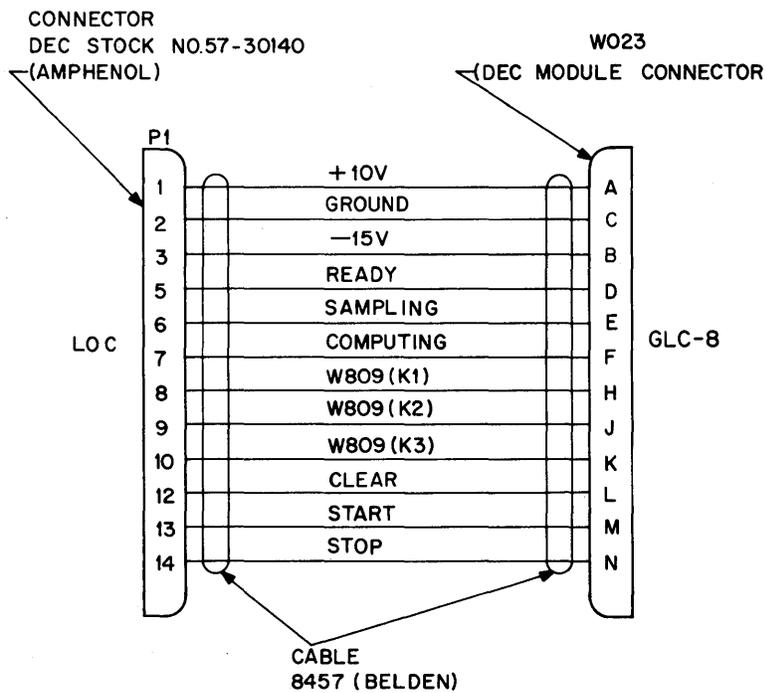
LOC/GLC-8 Cable Assembly, Fabrication Drawings
